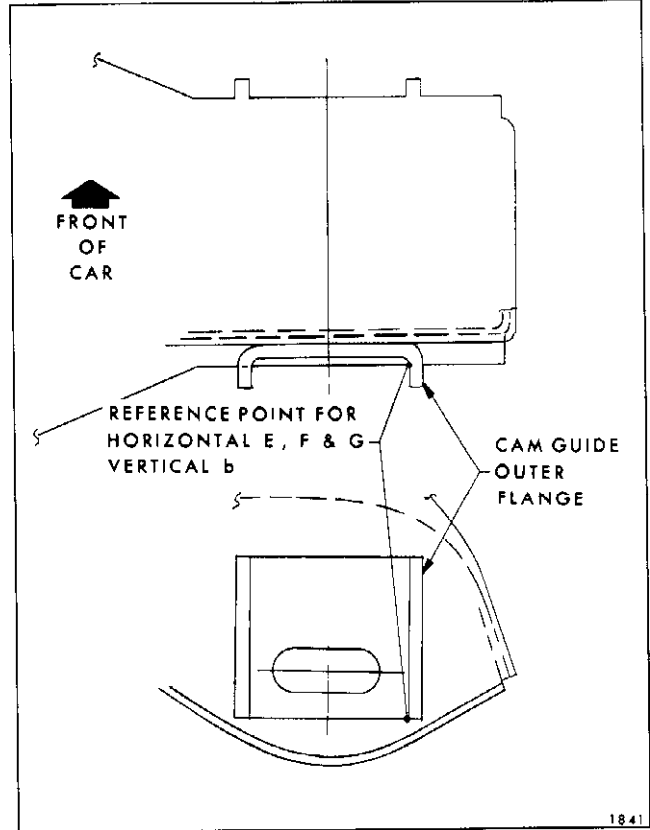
Lower Control Arm Adjusting Cam Guide
